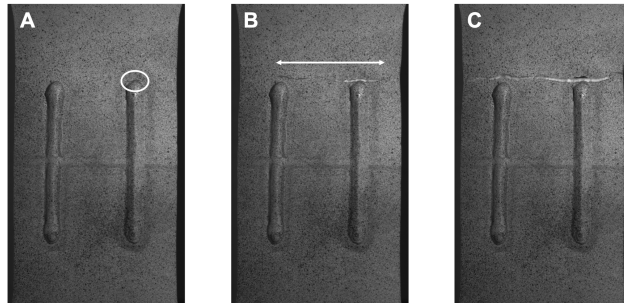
Fracture of specimen with cross weld speed 18 mm/s, with PWHT.
